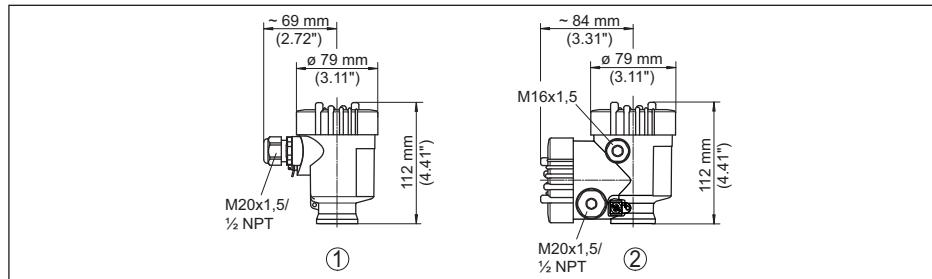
Housing versions in protection IP66/IP67 (with integrated display and adjustment module the housing is 9 mm/0.35 in higher)
